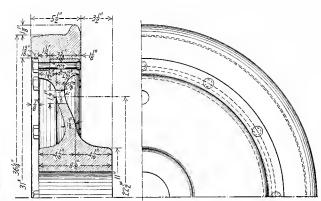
Bolted Type Coach Wheel with Cast Steel Plate Center.
